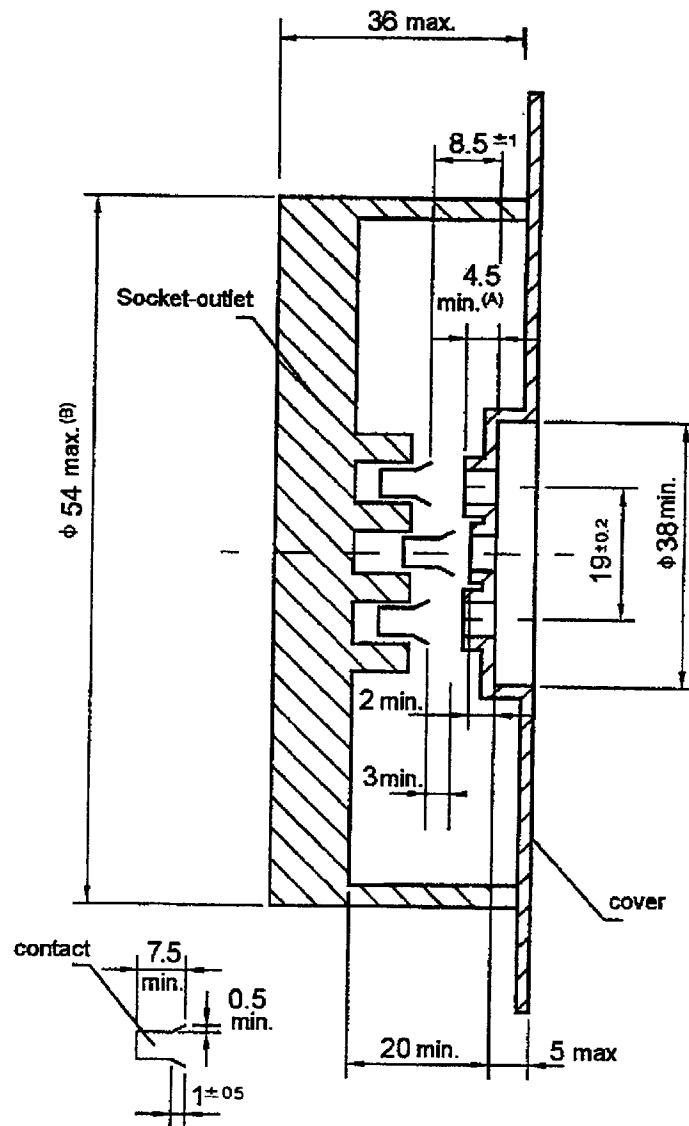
Dimensions of two-pin portable socket-outlet and adaptor
